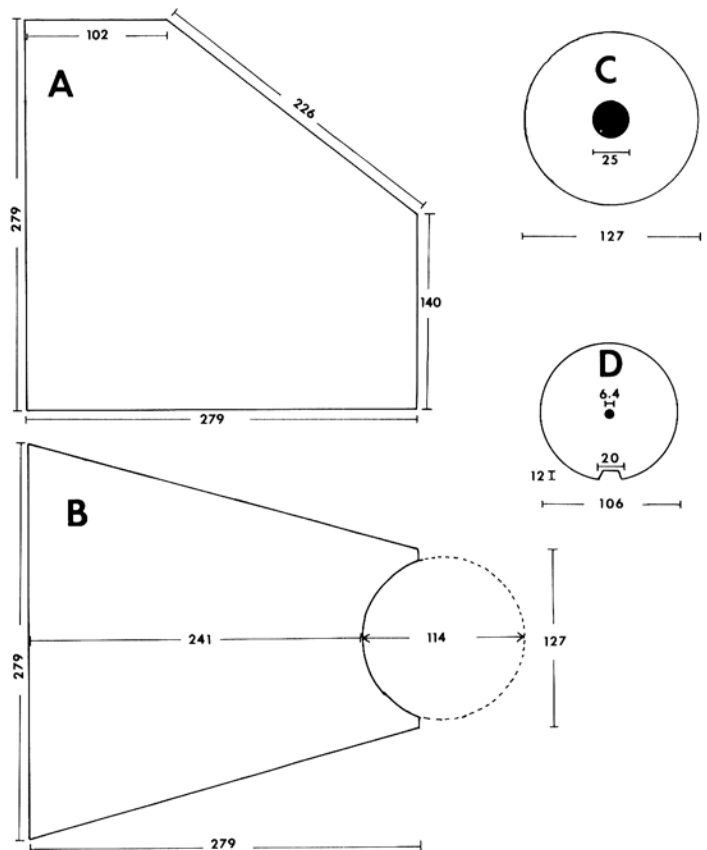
PVC sheet components of the trap. (A) Wind vane. (B) Rain shield. (C) Bottom plate of housing. (D) Chart drive retaining plate. All components are cut from 5.6-mm PVC sheet. All dimensions shown are in millimeters.
